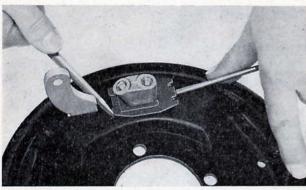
Prising up the rear brake cylinder retainer plate to release the locating tabs (brake assembly removed from vehicle for clarity of illustration)
